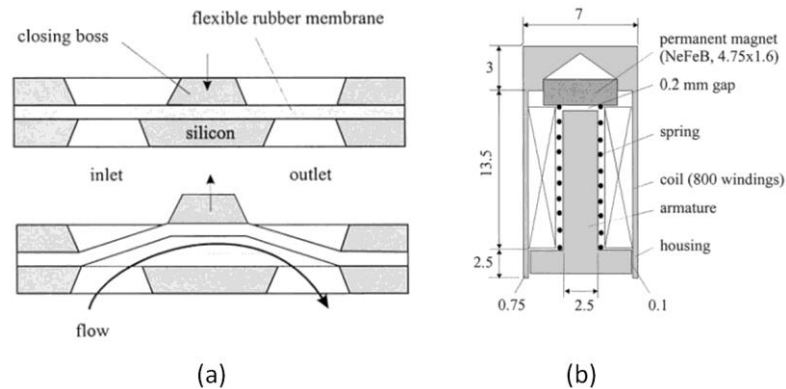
A bistable electromagnetic valve: (a) Cross-section of the valve part (b) Cross-section of the cylindrical electromagnetic actuator [BOHM 2000]
